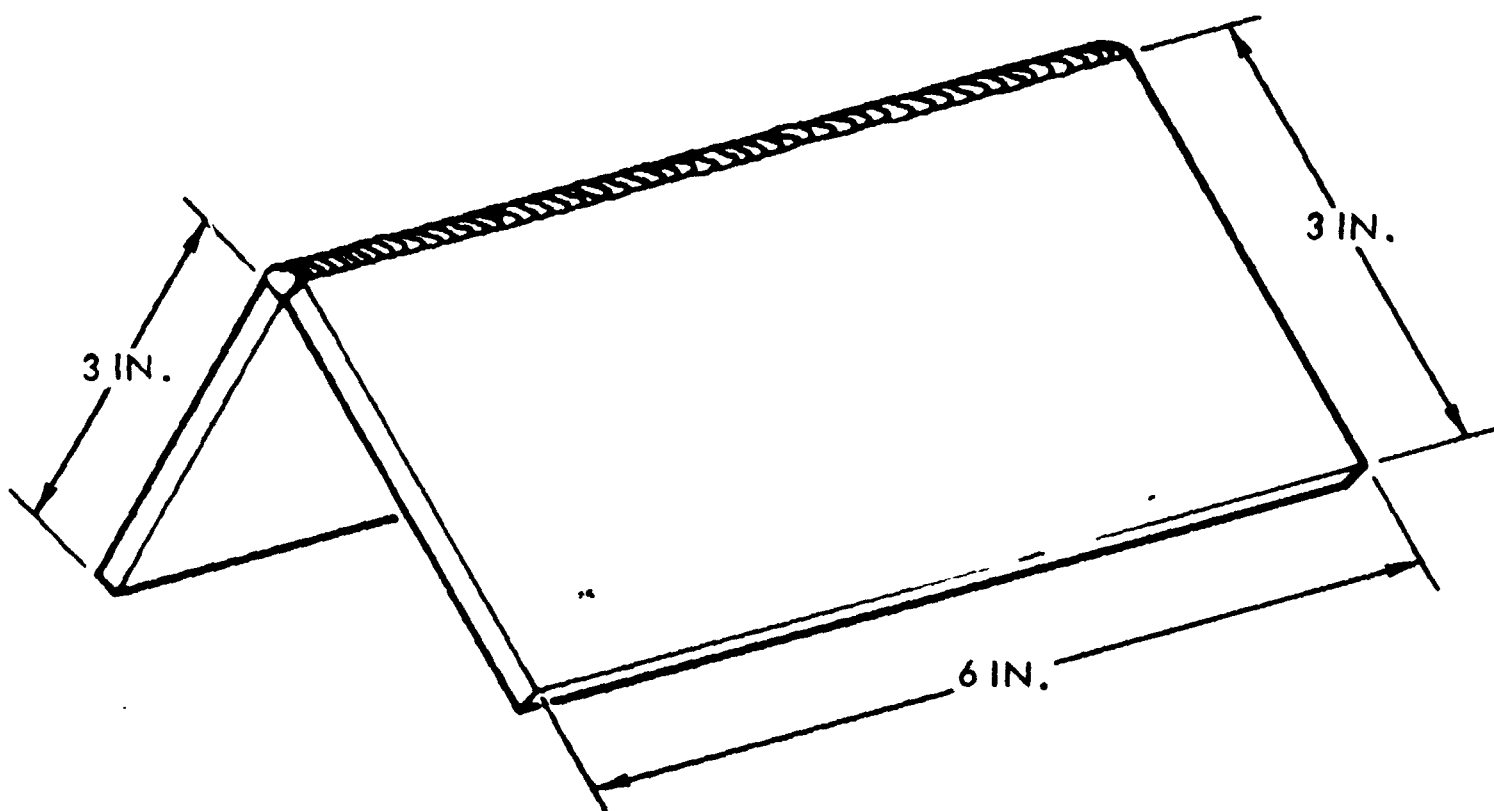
Corner Weld Joint Specimen (Manual)
